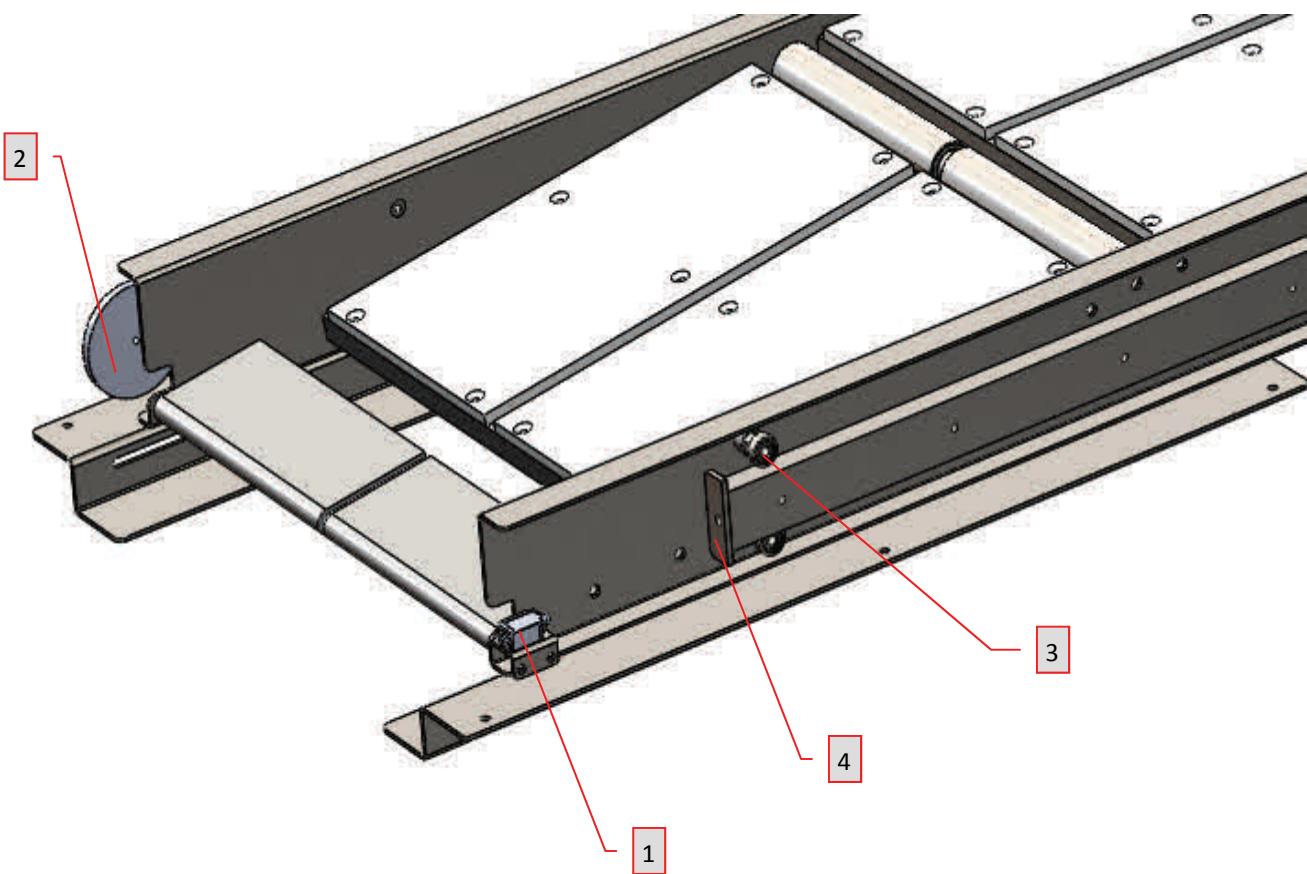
retracting Conveyor Assembly with Side Plates Removed
